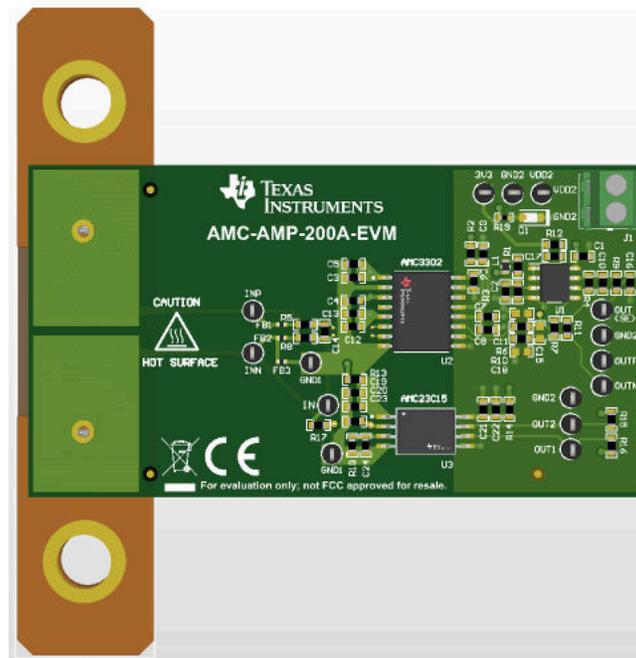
AMC-AMP-200A-EVM Top PCB Drawing
